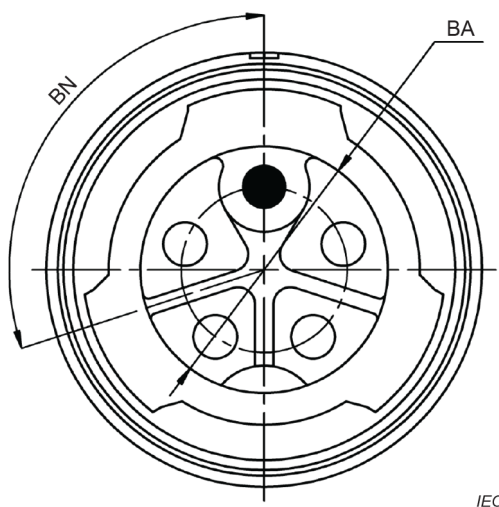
Front view of the female side of the push-pull housing for K-coding
